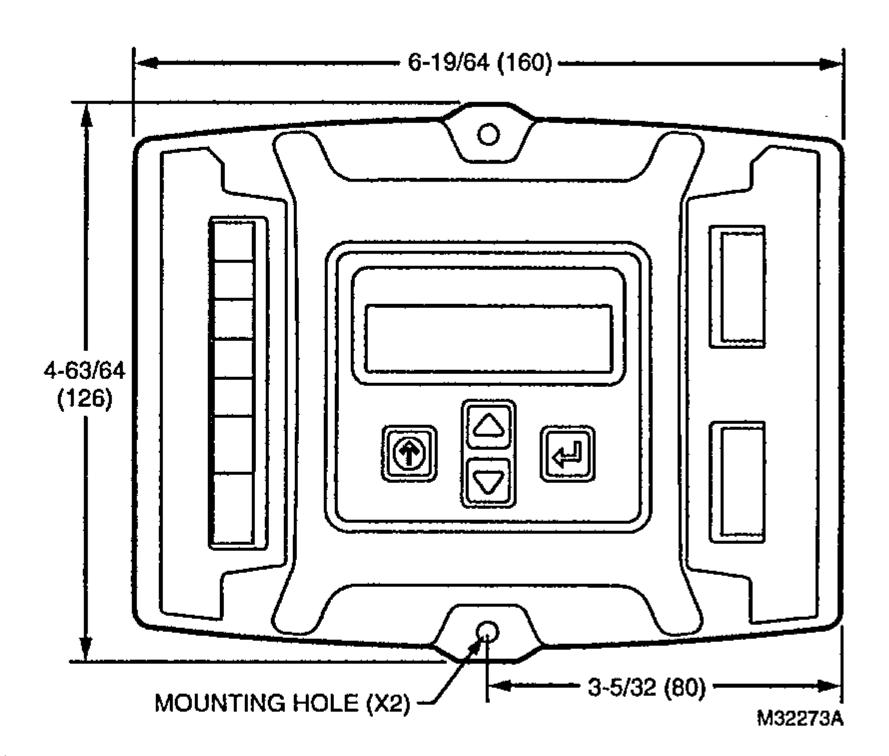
Dimensions in inches (mm) showing mounting holes.
